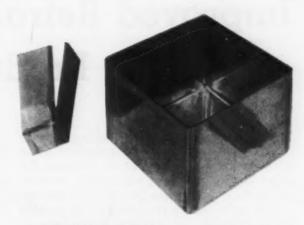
Various sized aluminum containers are lap welded with one simple corner-weld tool. The finished containers are air-tight, moisture-proof, and made from single sheets.
